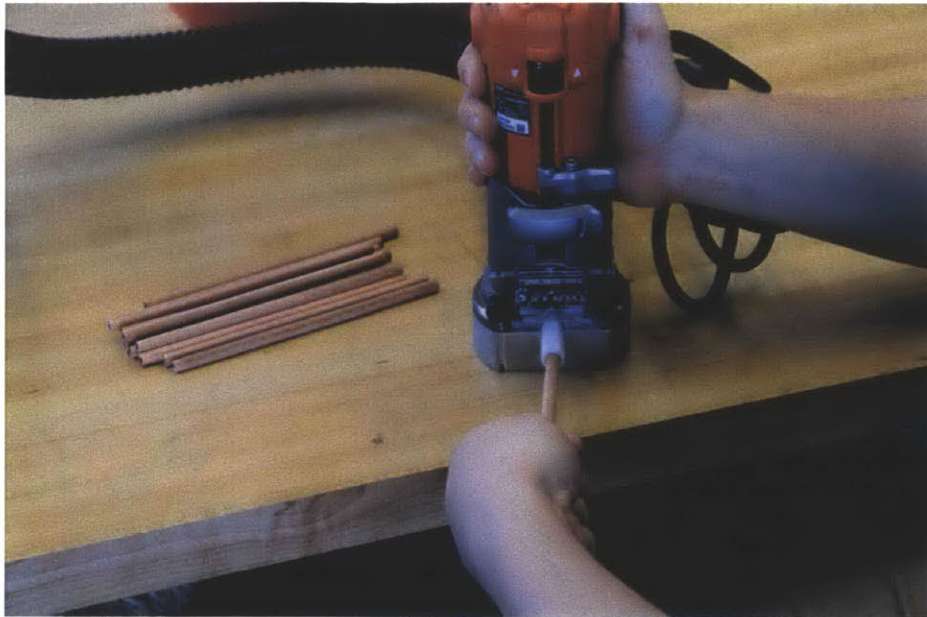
Cutting the shoulder for Sprout by hand using the jig built by members of the Sprout team.
